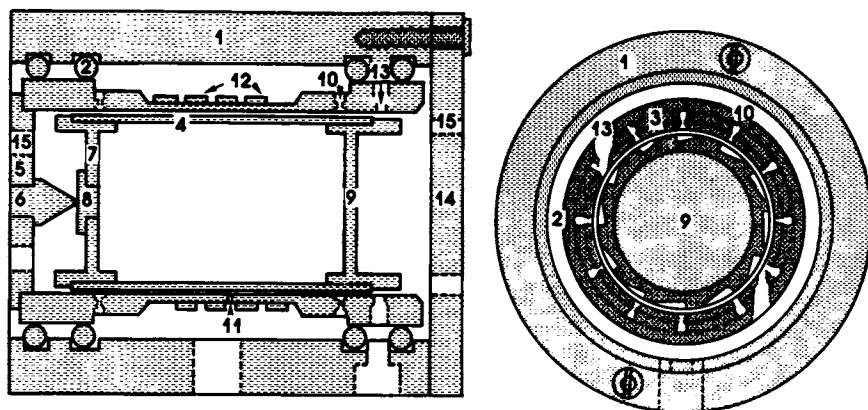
Side and end section views of the high speed cylindrical NMR sample spinner assembly. Key: 1, housing; 2, O-ring; 3, stator; 4, rotor; 5, lower end plate; 6, bearing point; 7, lower rotor end cap; 8, bearing button; 9, rotor drive end cap; 10, air bearing orifice and pocket; 11, cooling air hole; 12, NMR receiver coil; 13, turbine drive jet; 14, upper end plate; and 15, exhaust holes. (Reproduced, with permission, from Ref. 8.)
